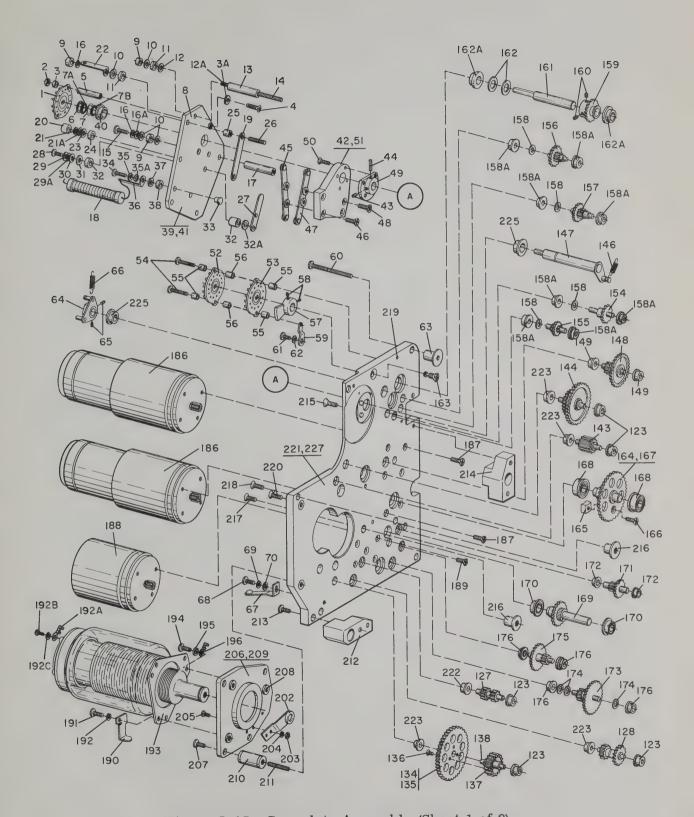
Gearplate Assembly (Sheet 1 of 2).
